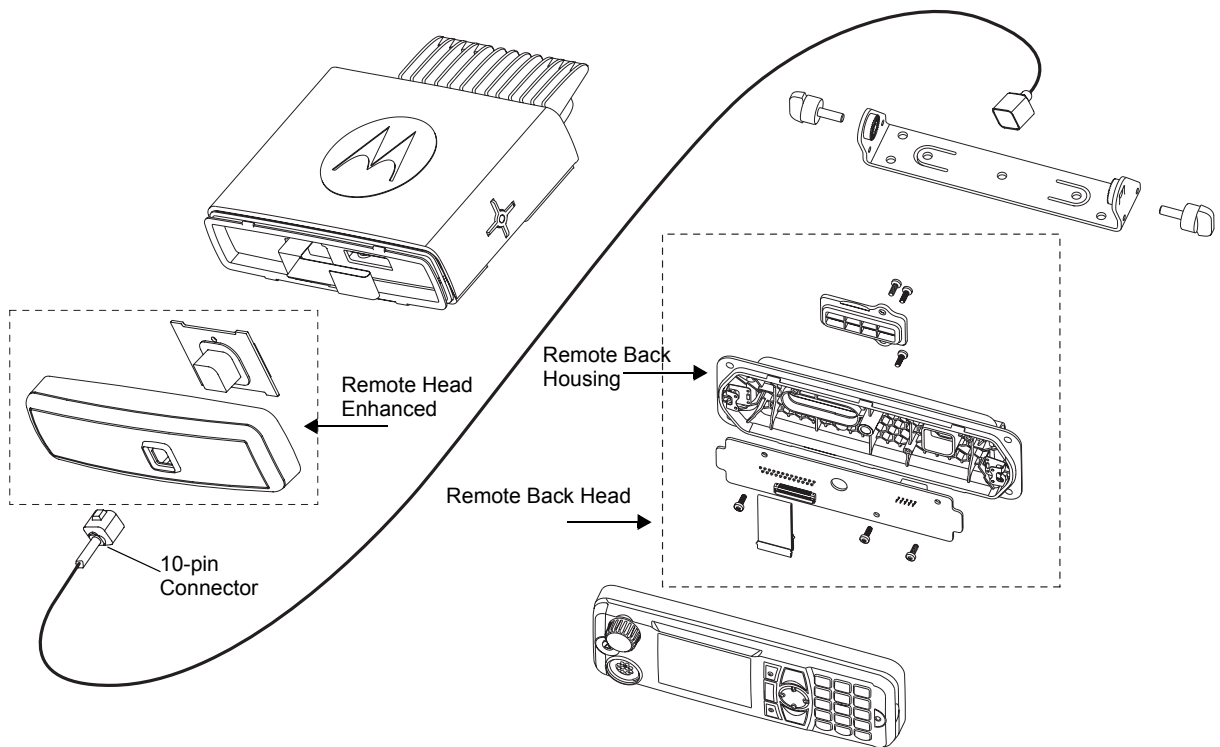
Remote Mount Enhanced Control Head with Remote Head Enhanced
